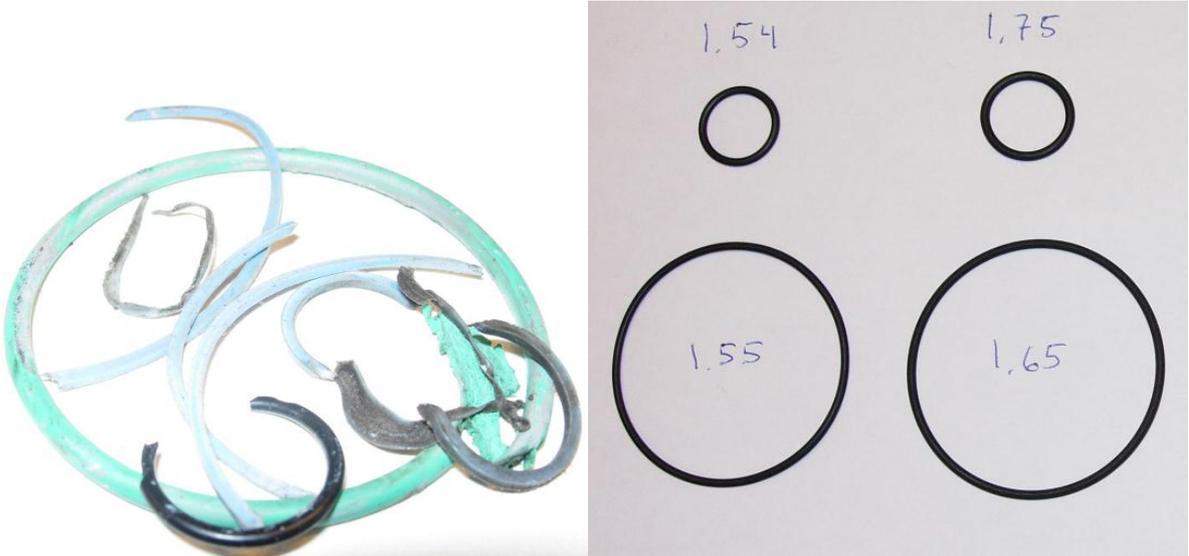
O-Rings manufactured of typical materials having failed after contact with methanol. (50)
